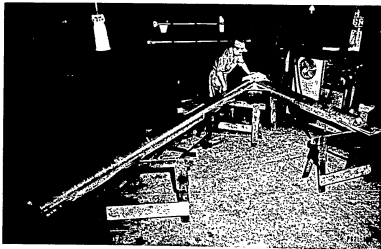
One of front support legs tack-welded during fabrication.
